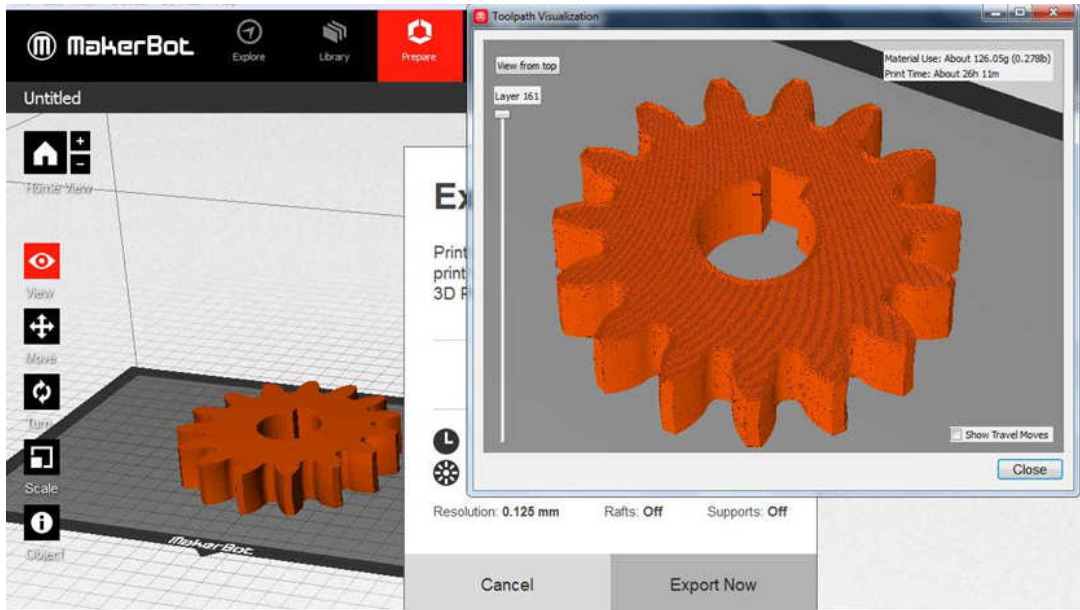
Slicing of the 3D gear model into layers and calculation of the head unit movements.
